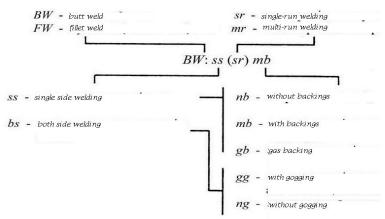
Welding Type and Conditions Coding Scheme
